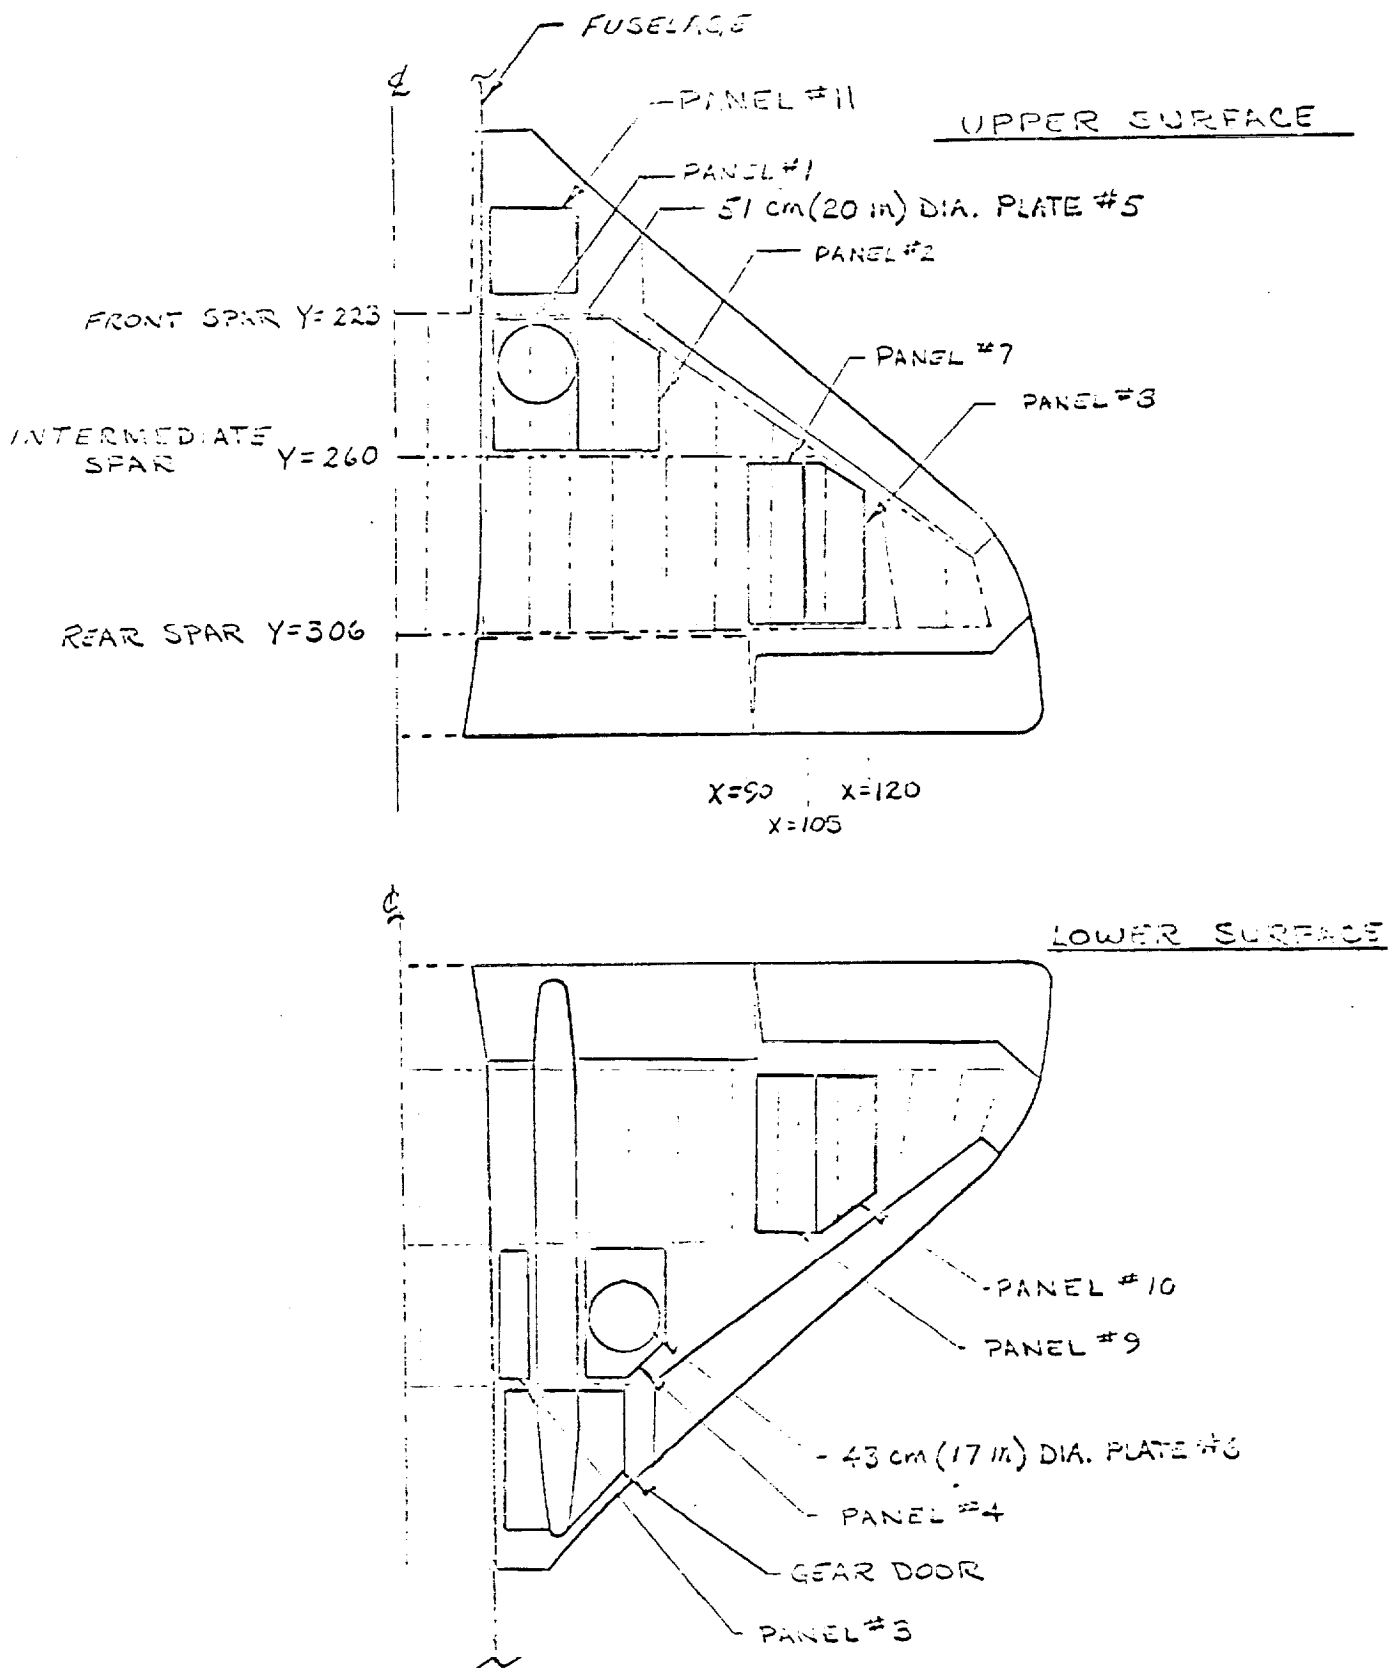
HOLE CONFIGURATION #8. PANELS 7,8,9,&10 REMOVED
